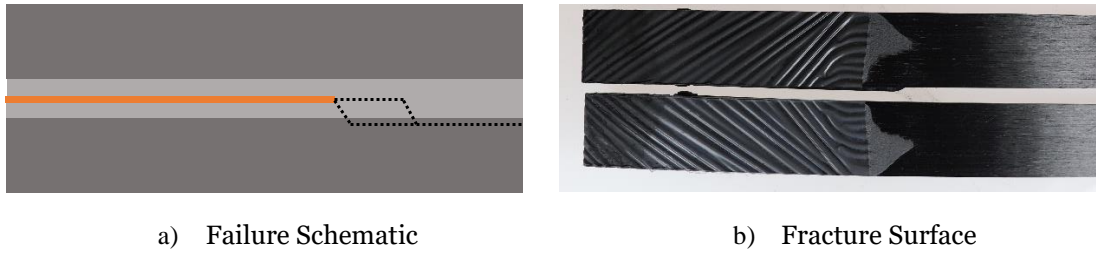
Typical failure schematic and fracture surfaces for 0.4mm nominal adhesive thickness DCB tests for HTD conditions
